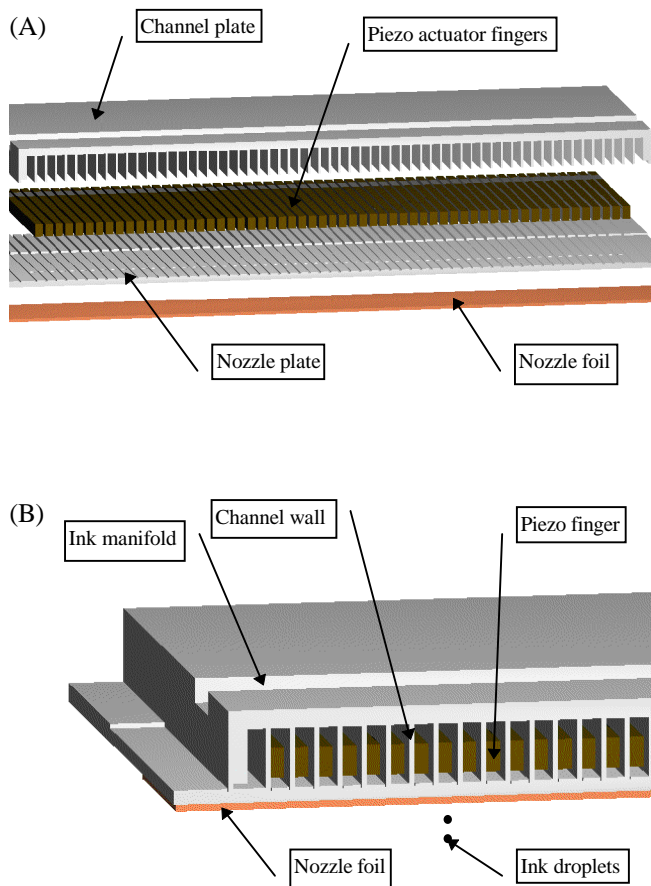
Major parts of a bend mode actuator printhead (A) before assembly (B) assembled
